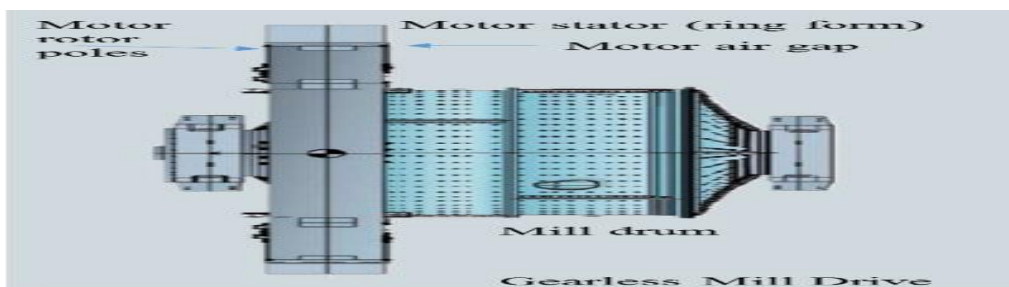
Schematic of Typical Gearless Mill Drive system [6]
